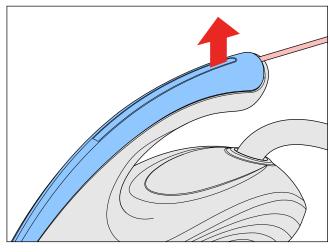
Using "-" screw driver to lift up the Inlay and release the catch at the end of the handle.
